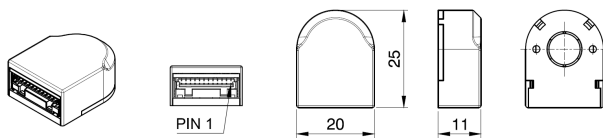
NME3-xxx-xxx-xx-C1 (= closed lid, small housing).
